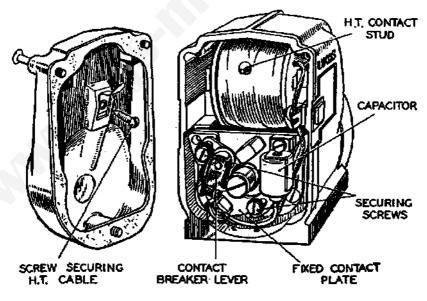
ABRANGEMENT OF ROTATING-MAGNET CONTACT-BREAKER.
